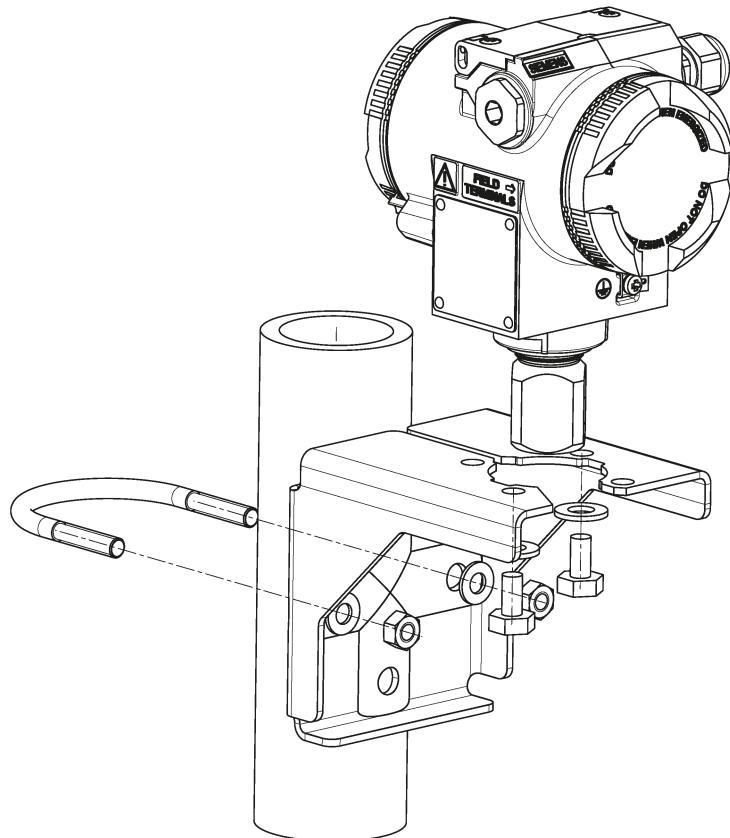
Fastening the pressure transmitter on the mounting bracket
